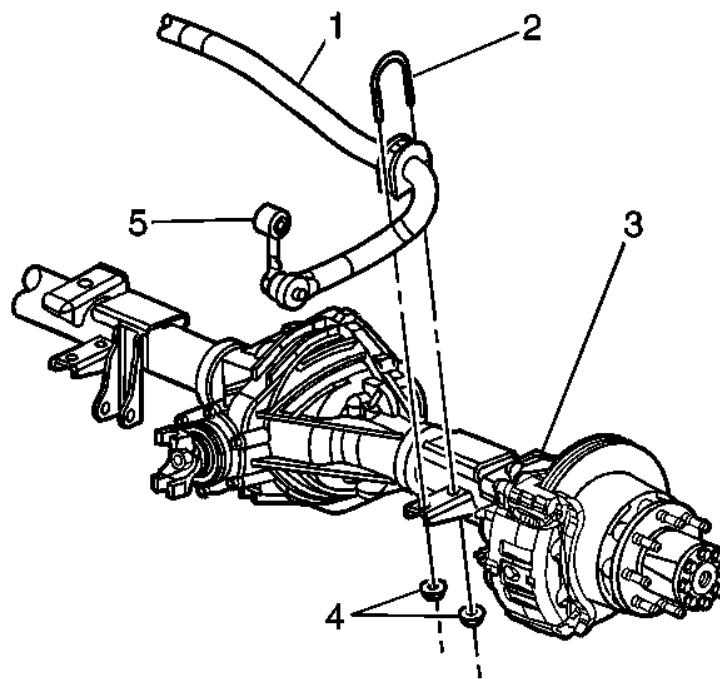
Stabilizer Shaft, U-Bolts, Nuts & Axle
